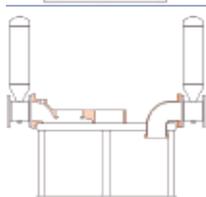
Removal of components leaves discharge housing in the frame while suction and discharge piping have not been disturbed.
